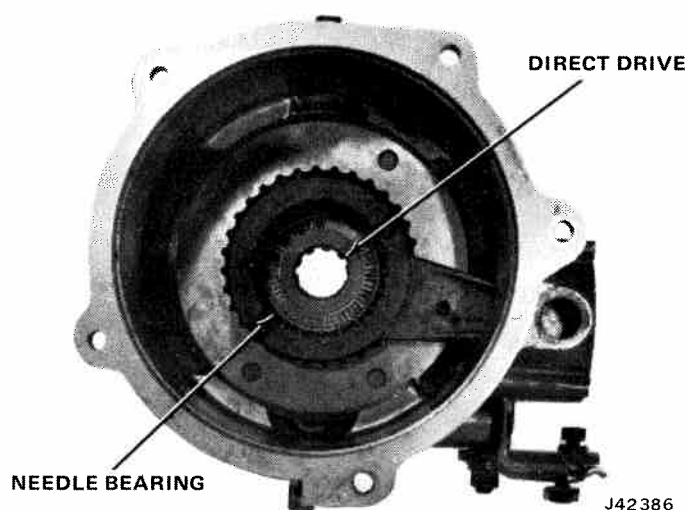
Direct Drive Sleeve and Needle Bearing Installed
